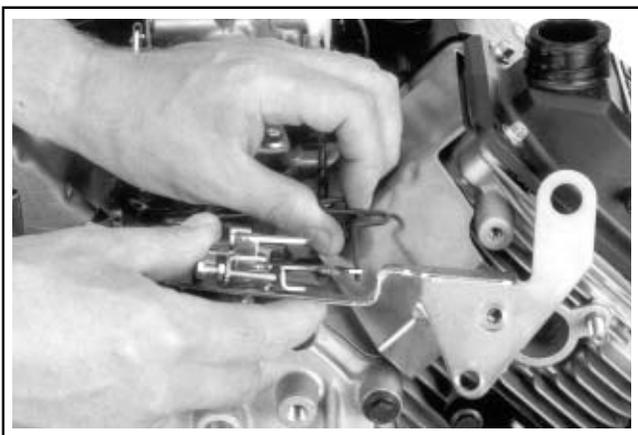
Disconnecting Choke Linkage from Actuator Lever.
